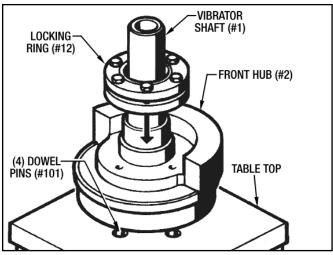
Installing Front Hub to Vibrator Shaft
